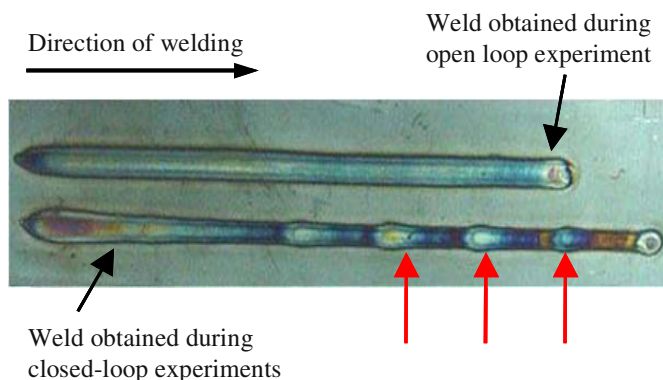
Weld beads during open-loop and closed-loop welding experiments
